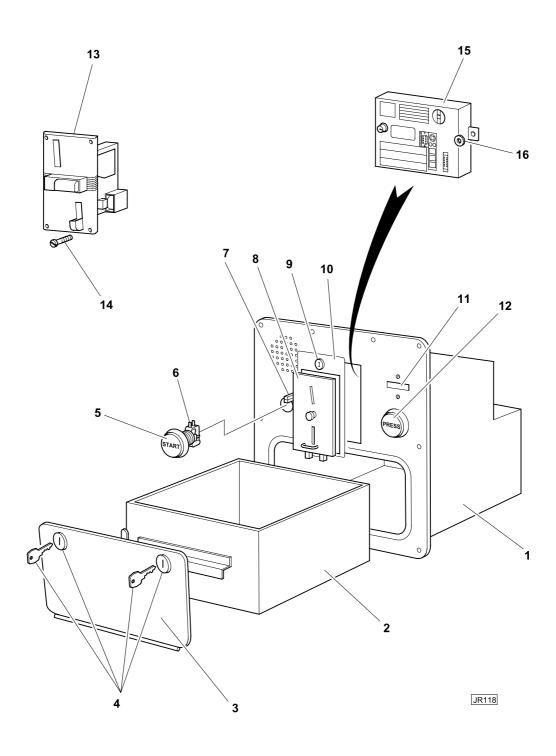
Coin collection assembly - System 4001 (Standard or Video version)
